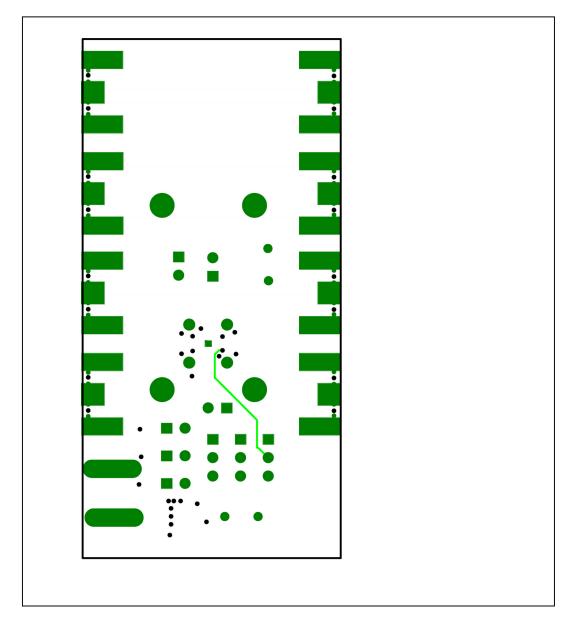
MAX3748A EV Kit PC Board Layout - Solder Side (2X)
